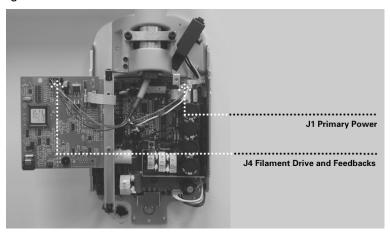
Connecting the Horizontal Arm Cables to the Control Unit
